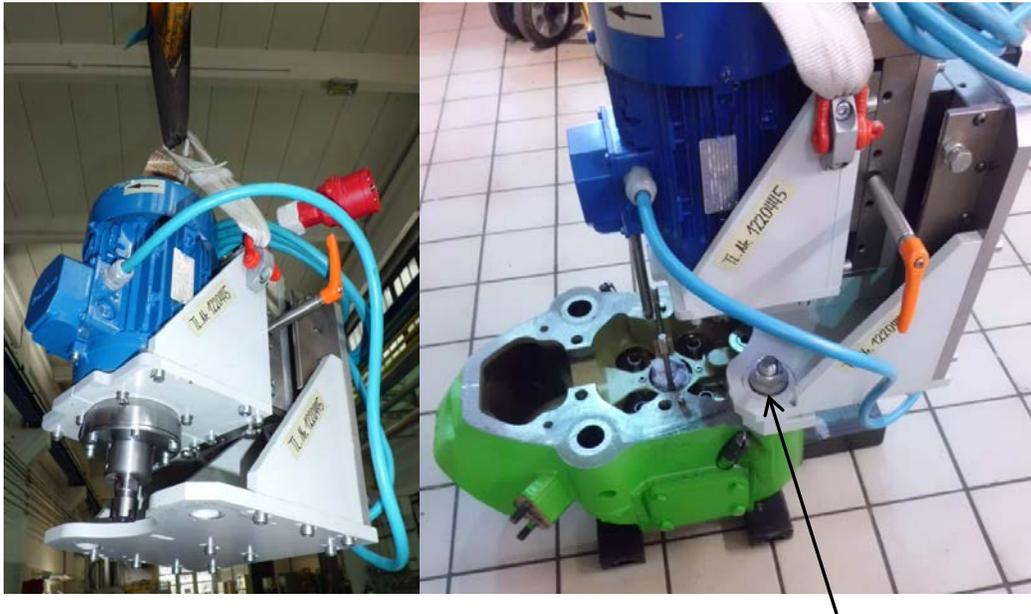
Place the milling machine on the cylinder head, fit and tighten the nuts
